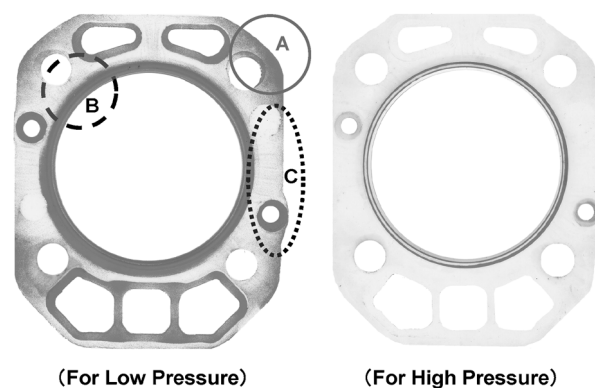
Surface Pressure of Soft Facing Gasket with Flat Core
